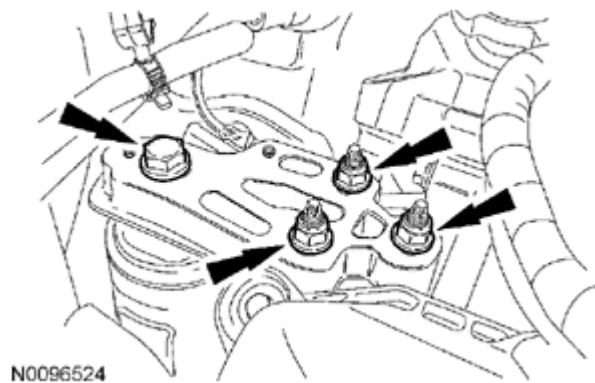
Locating Bolt, Nuts And Engine Mount Bracket
